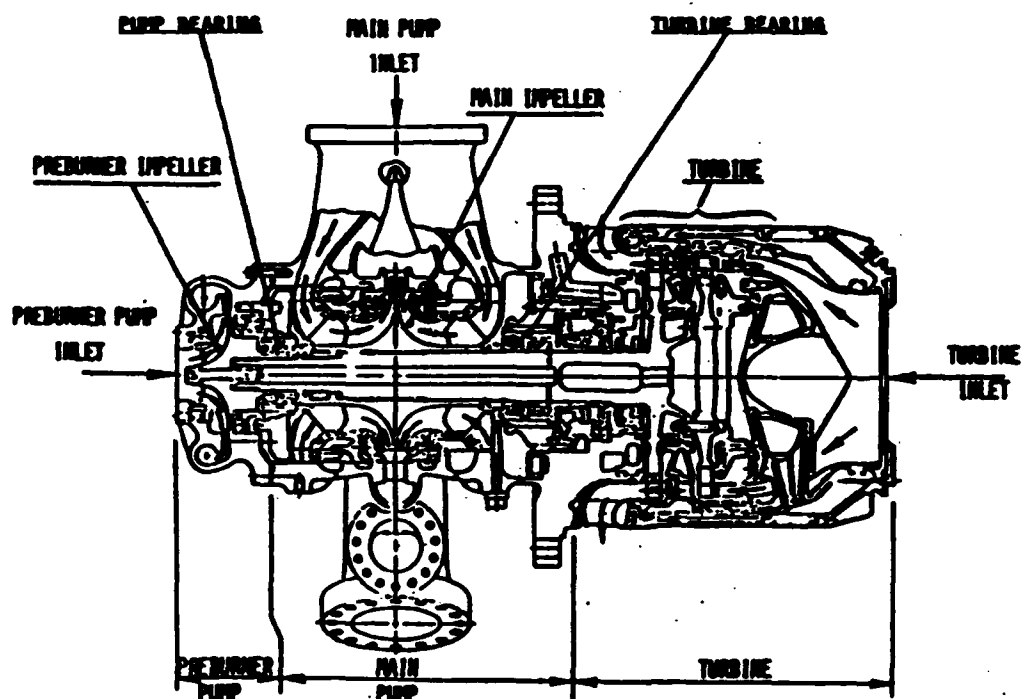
Space Shuttle Main Engine High Pressure Oxidizer Turbopump Assembly (SSME HPOTP).
